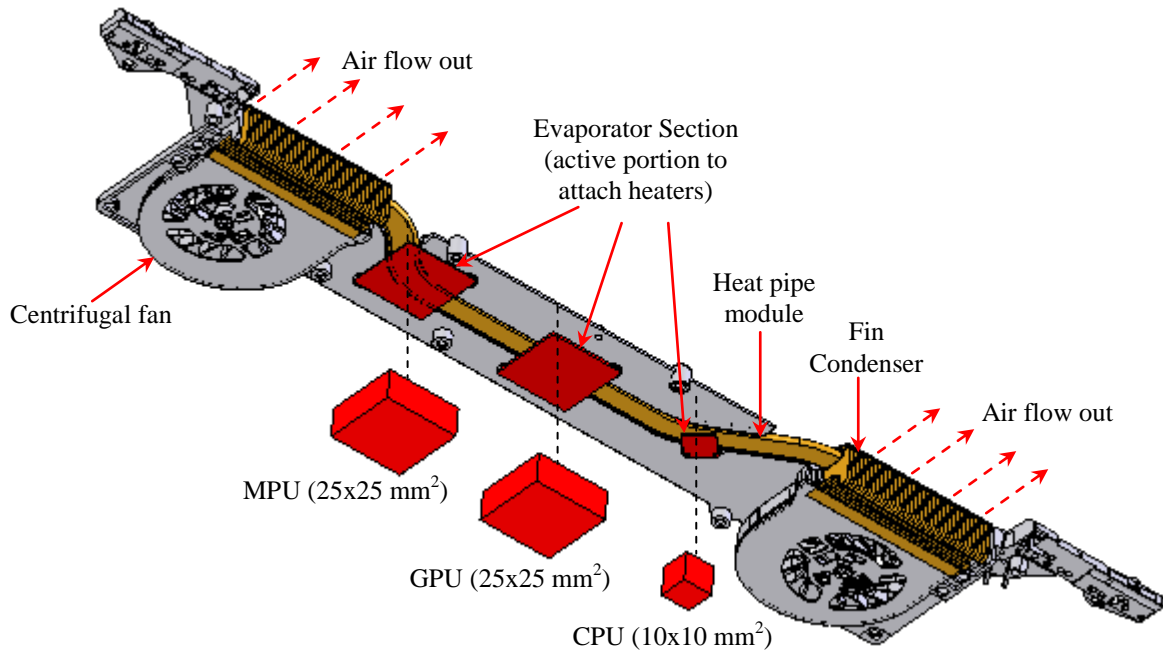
Bottom perspective view of the Heat Pipe Cooling Unit showing the evaporator sections and related components.
